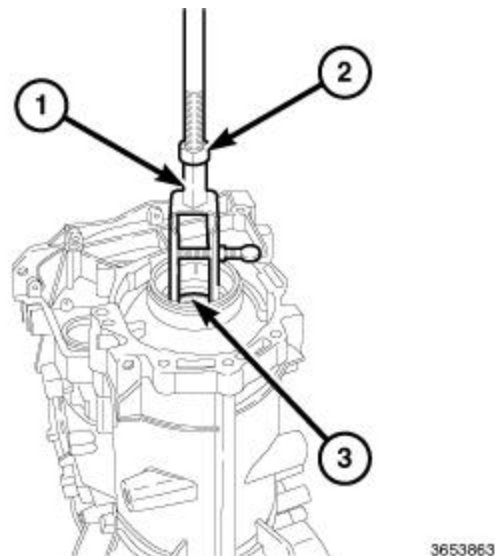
Bearing Cup, Slide Hammer & Inner Needle Bearing
